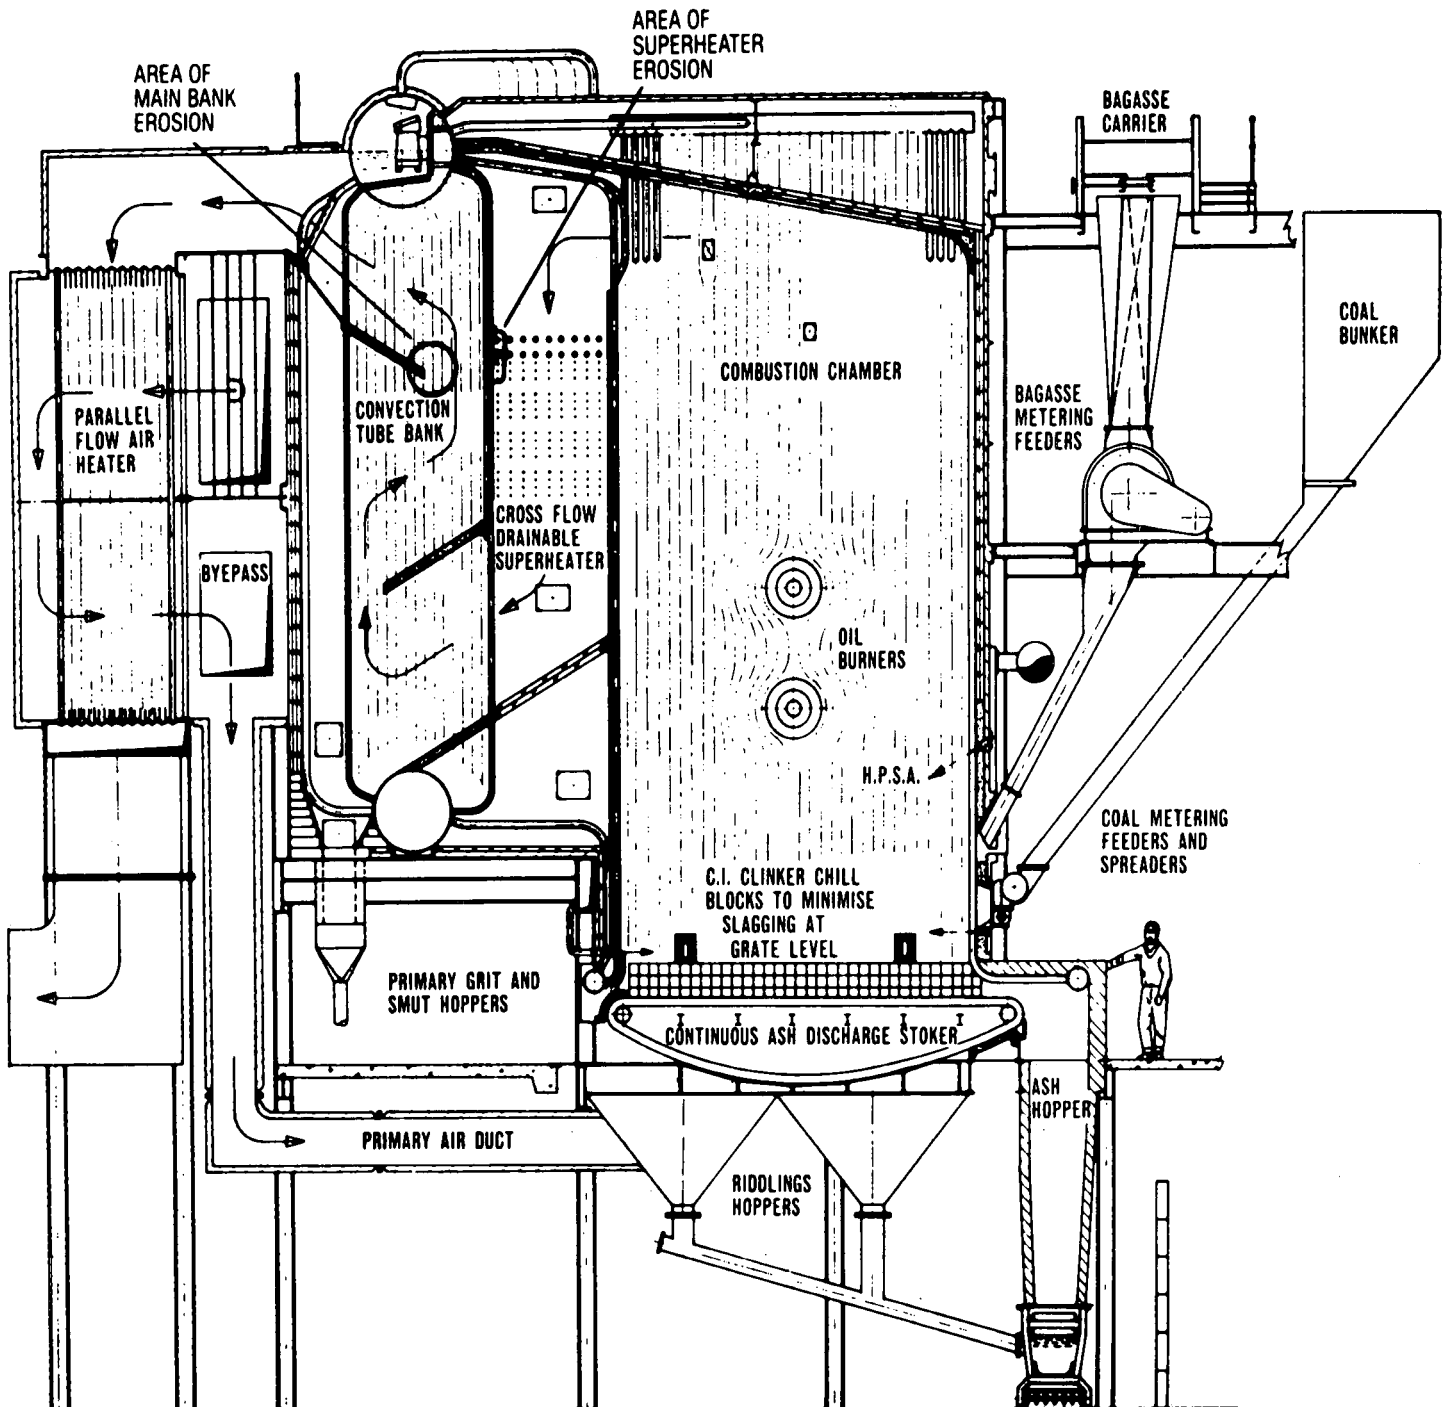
General arrangement of two drum bagasse, oil and coal fired watertube boiler fitted with suspension firing equipment and a continuous ash discharge stoker
